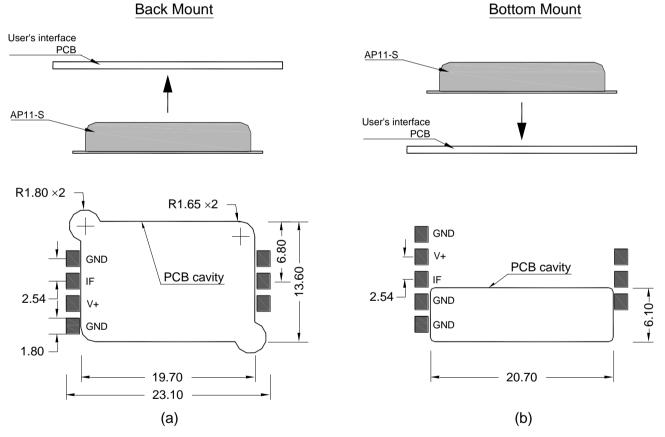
Mounting options and recommended PCB footprint for the AP11-S. (a) Back Mount (b) Bottom Mount.
